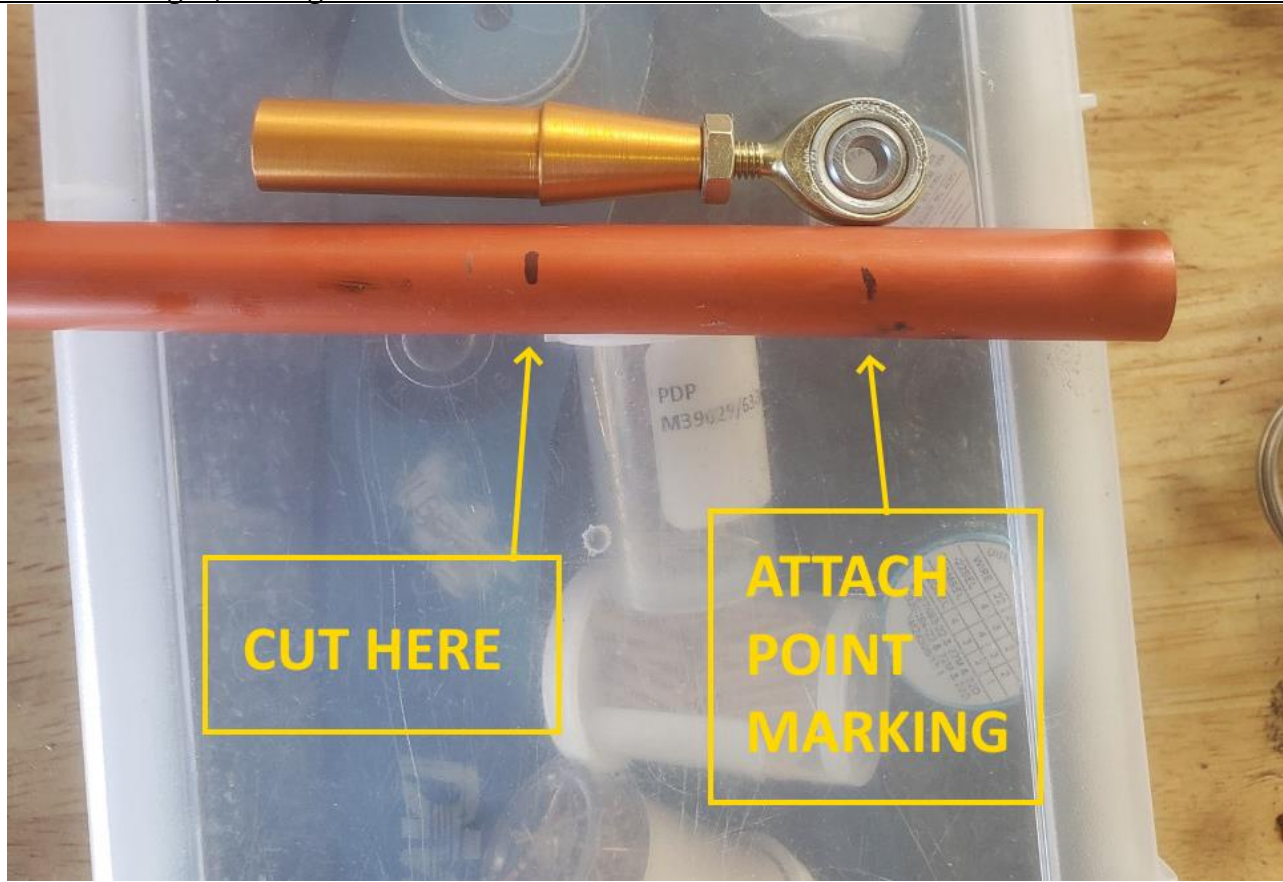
PUSH PULL TUBE TRIMMING
